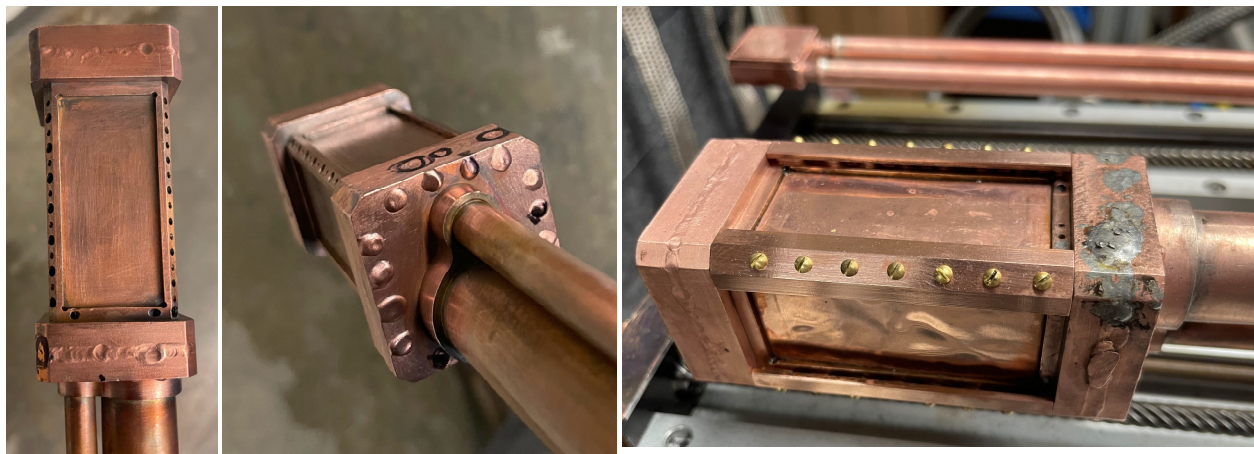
Final sealing approach combining welded seams and solder to seal any leaks
